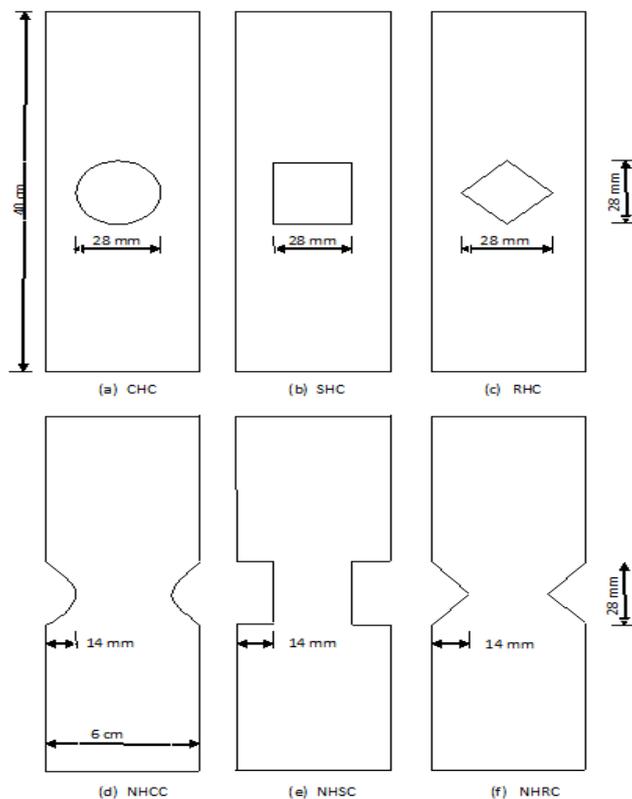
Schematic to Cut-outs Dimensions by Using Laser Machine
